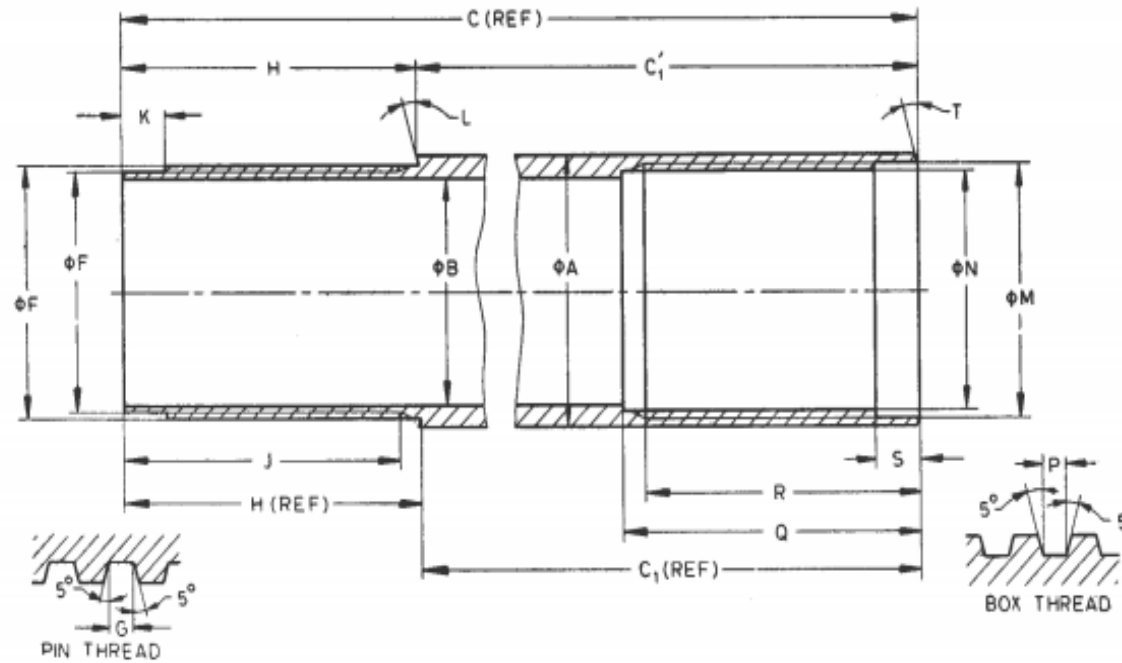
'W' DESIGN FLUSH JOINTED CASINGS — CASING TUBE
